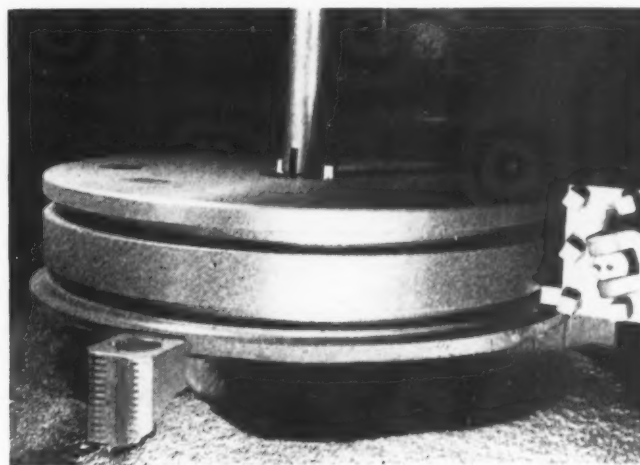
Simultaneously Boring and Grooving a Locomotive Piston with Stellite J-Metal Tools
